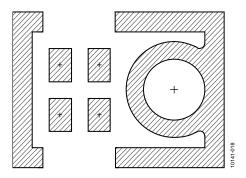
Example PCB Land Pattern with Broken Enclosing Ring
